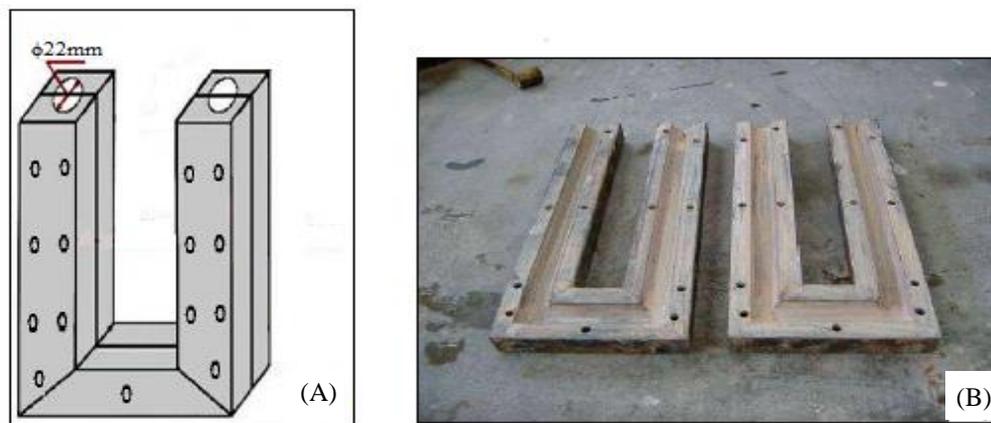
(a) Schematic drawing of the metal chill in "U" format and (b) the metal chill in the real "U" shape.
